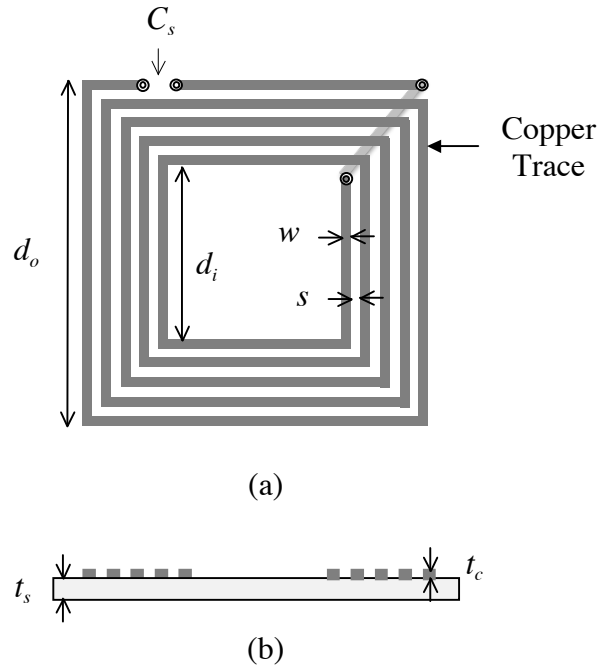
Geometry of printed spiral coil: (a) Top view (b) Side view
